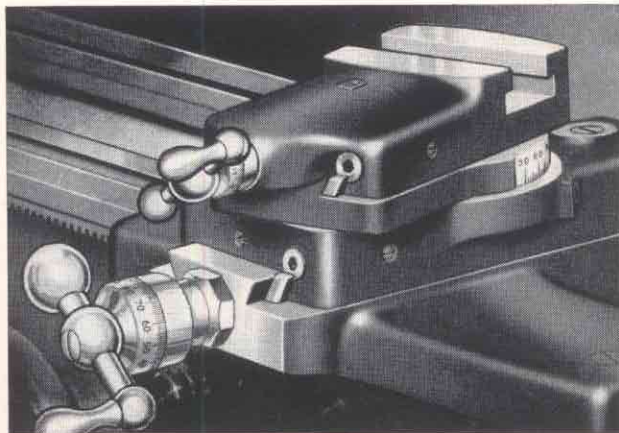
Close-up Showing Adjustable Tapered Gibs Used on Compound Rest Base and Top Dovetails of 10"-1" Collet and larger South Bend Lathes
